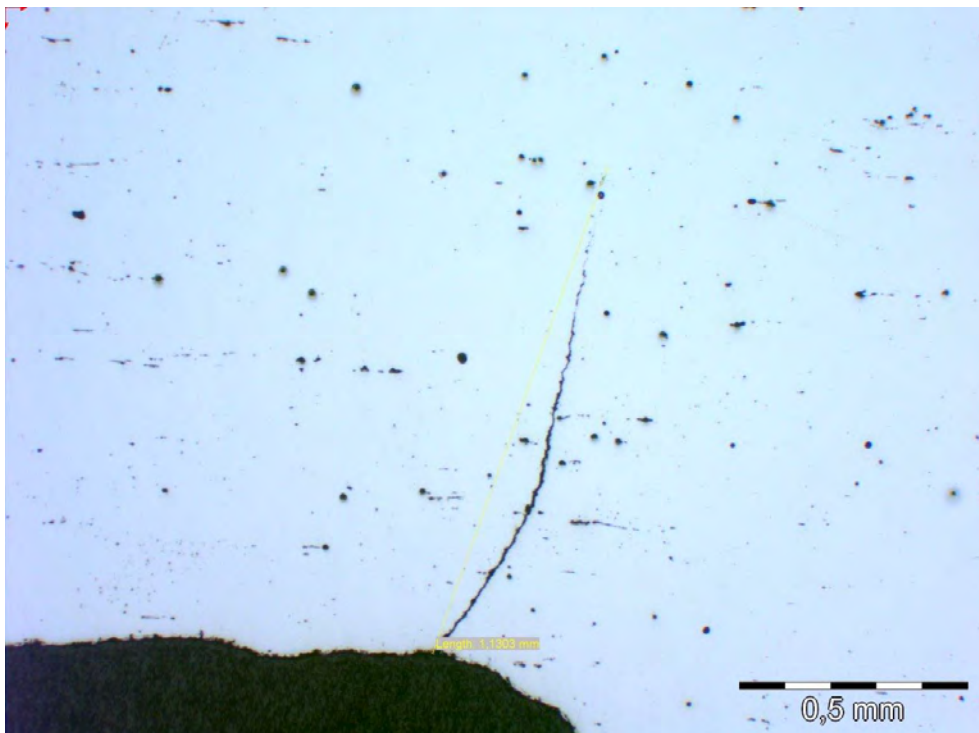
Cut three in crack at segment A, first ridge on barrel no. SFK 0120-A
